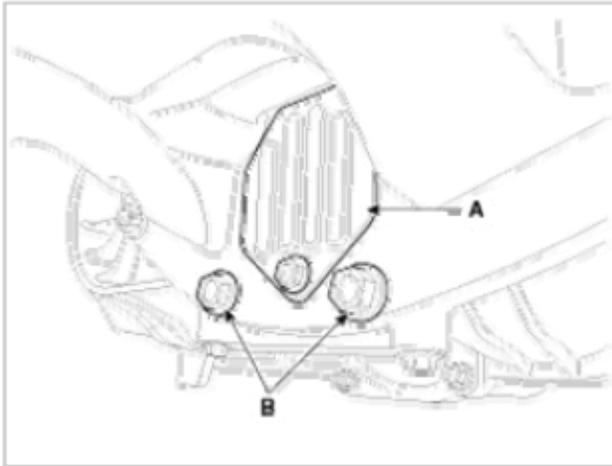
Locating Dust Cover On Bottom Of Upper Oil Pan And Transaxle Mounting Bolts
